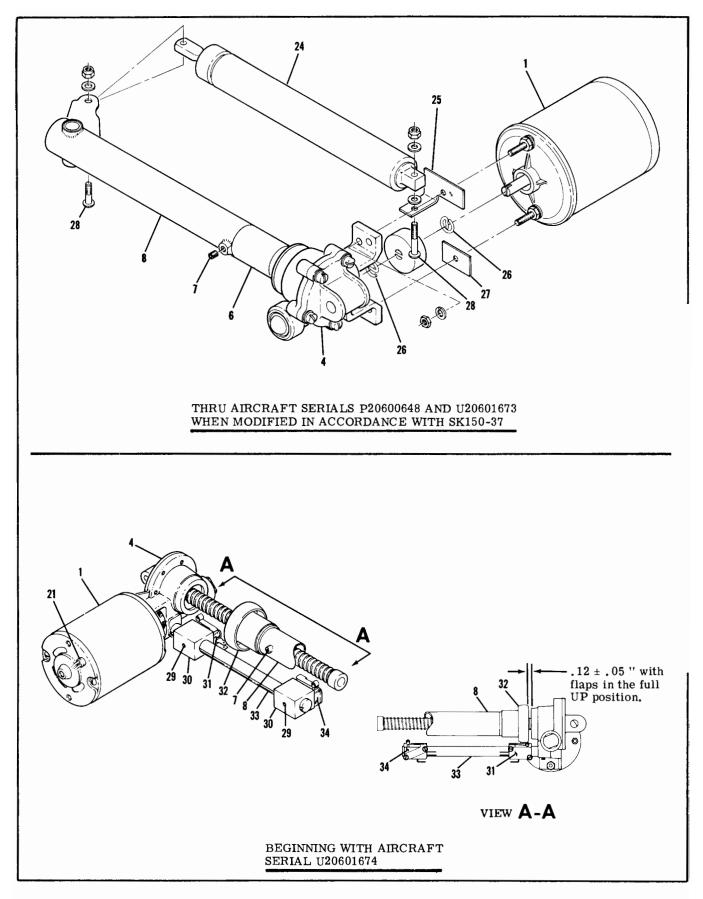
Flap Motor and Transmission Assembly (Sheet 2 of 3)
